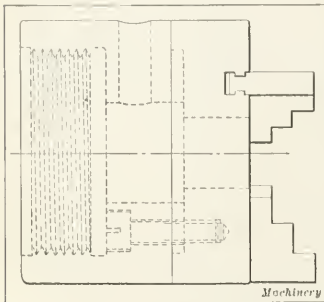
Adapter for fitting Small Chuck to Large Spindle
